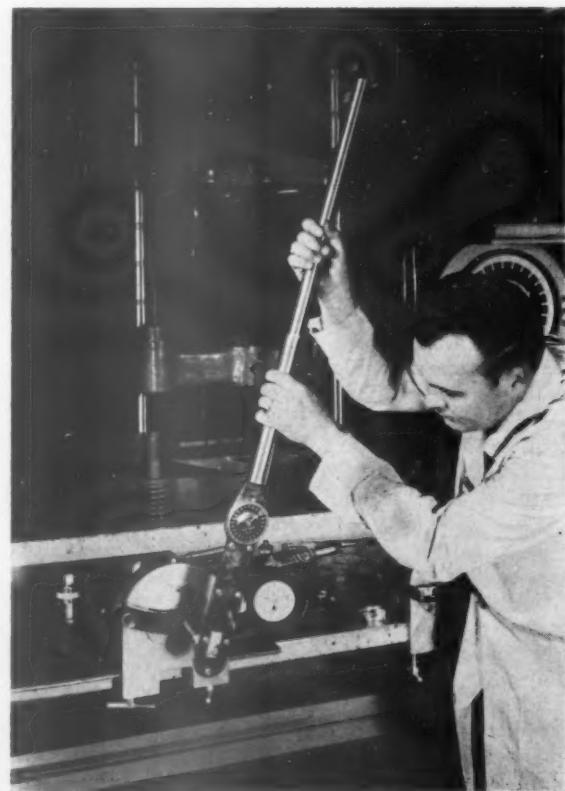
In tension-testing a steering knuckle bolt, note that the actual parts have been assembled in the tester to assure accuracy.
